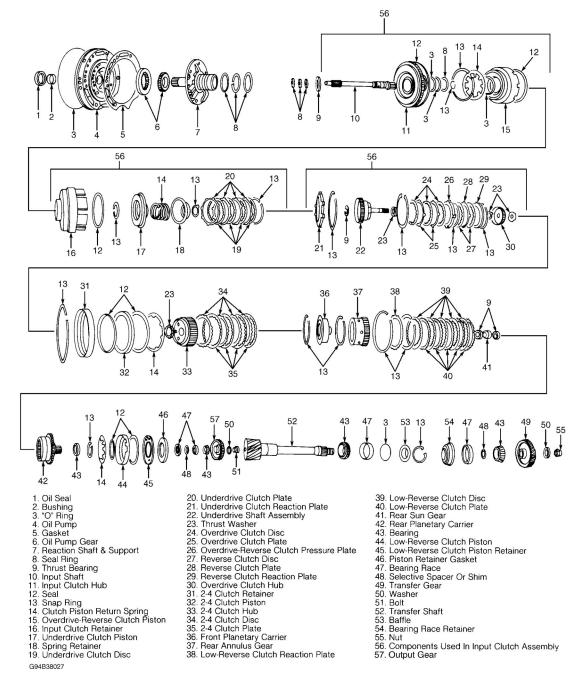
Exploded View Of Internal Transaxle Components Courtesy of CHRYSLER CORP.
